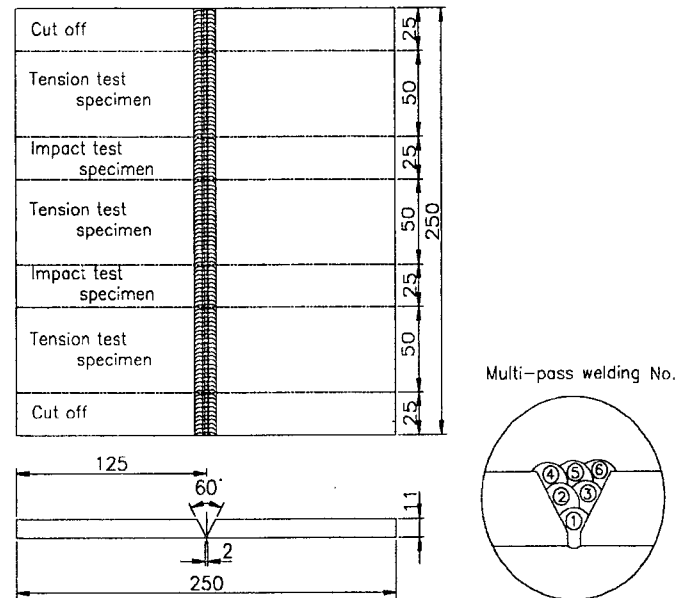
Joint design and locations of test specimens from underwater welded joints
